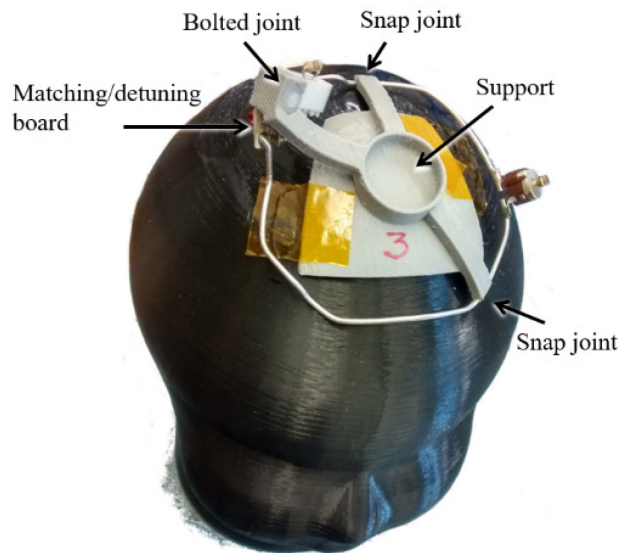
Part of element 3 containing the loop soldered to the matching/detuning board and both attached to the support. The three fixing joints are shown.
